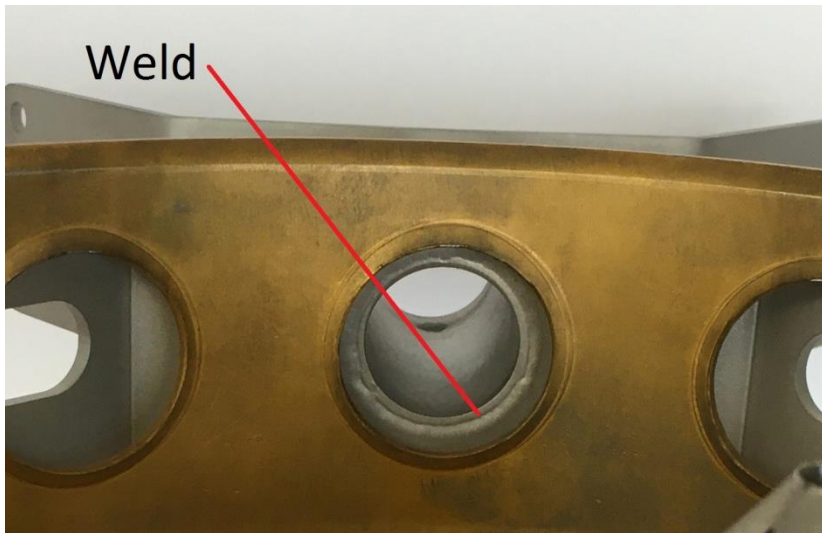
View of the affected weld. Note burner coil removed for clarity.
